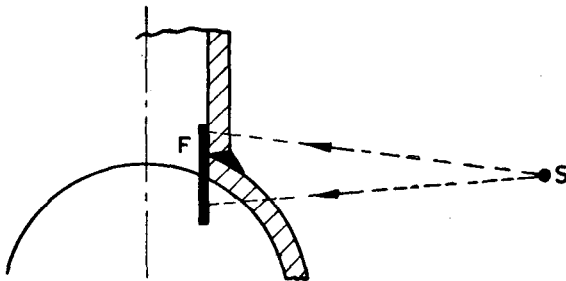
FILM INSIDE; SOURCE OUTSIDE, SINGLE WALL PENETRATION
